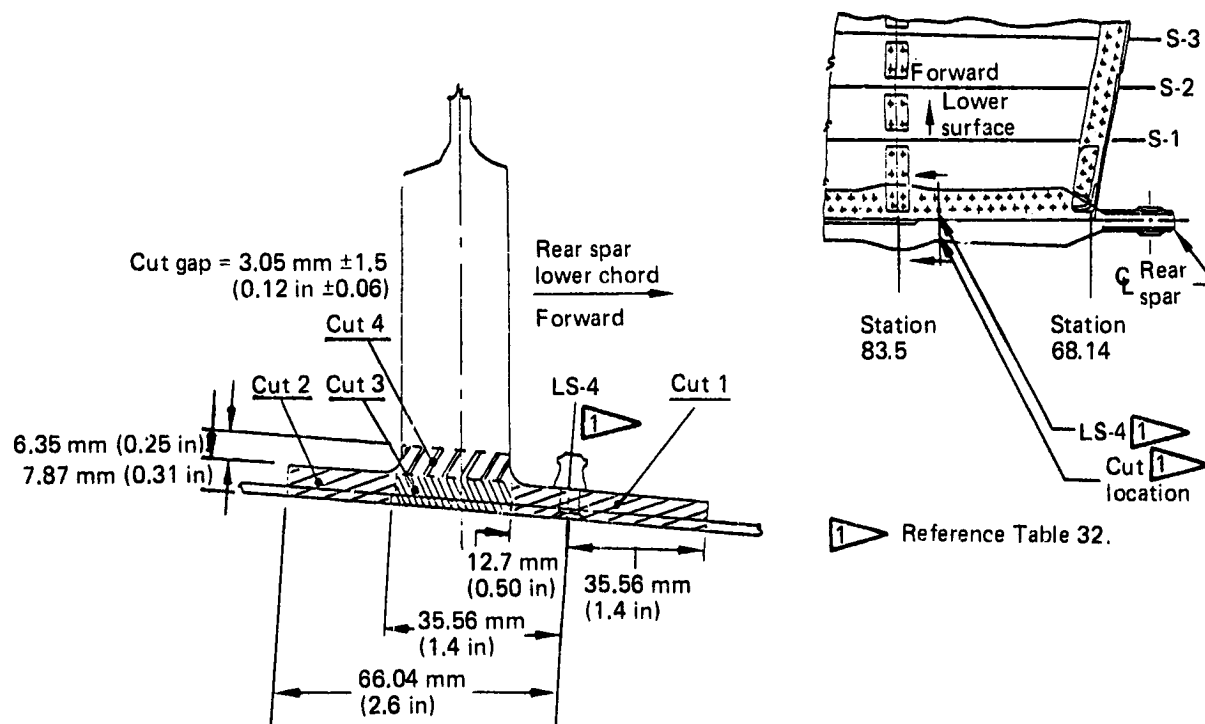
Stub Box Damage Tolerance Test—Rear-Spar and Lower Chord
